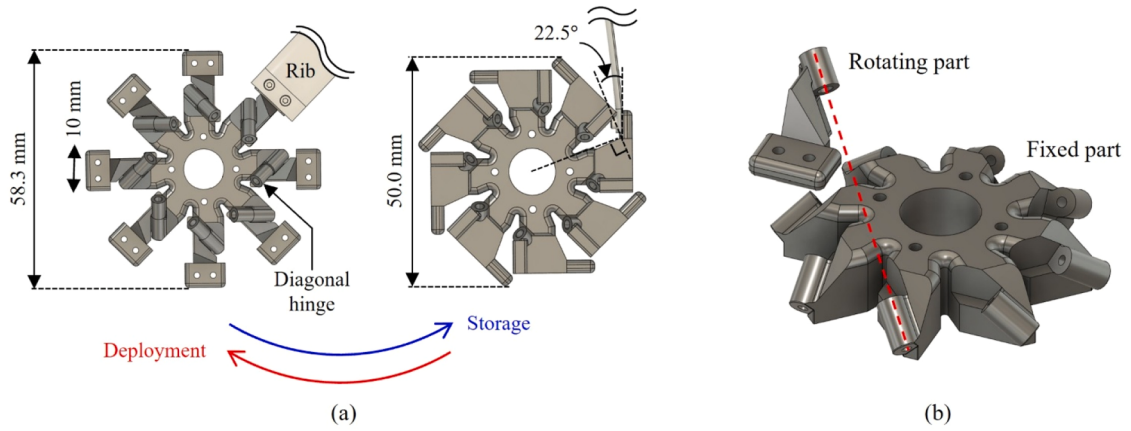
(a) Design of the hub in deployed and stowed state. (b) Assembly process of hinge structure.
